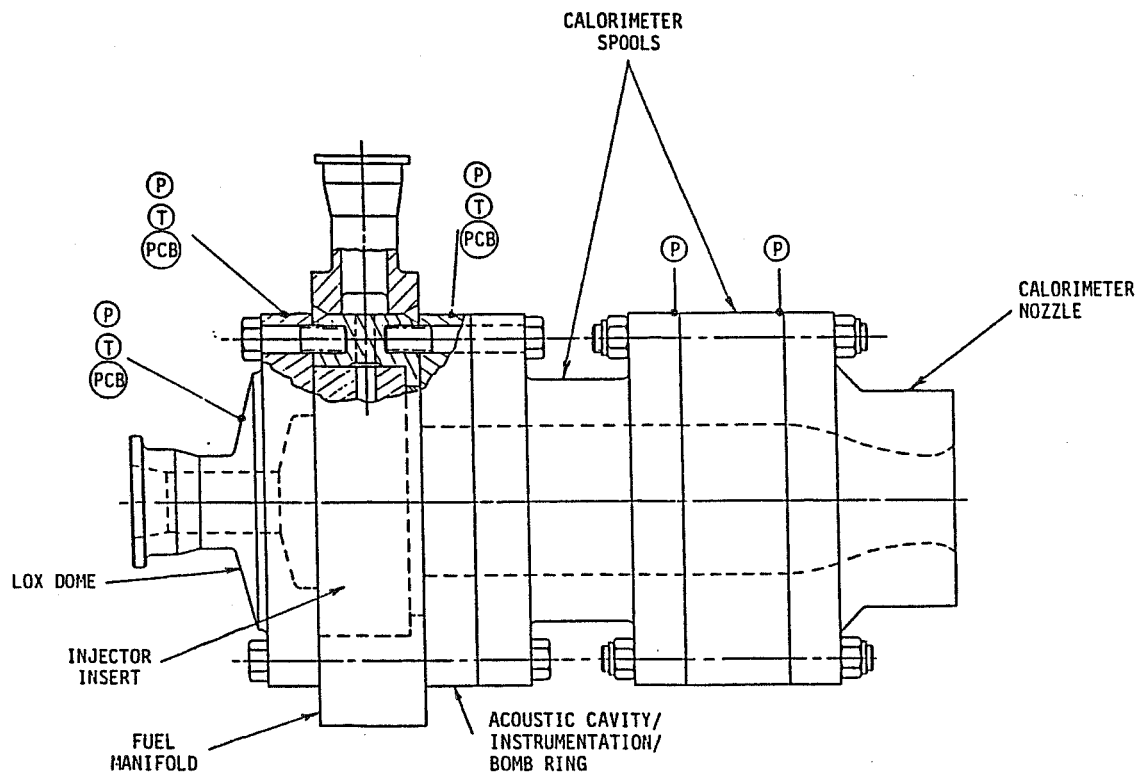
Assembly Schematic of 5.7-Inch Combustor
